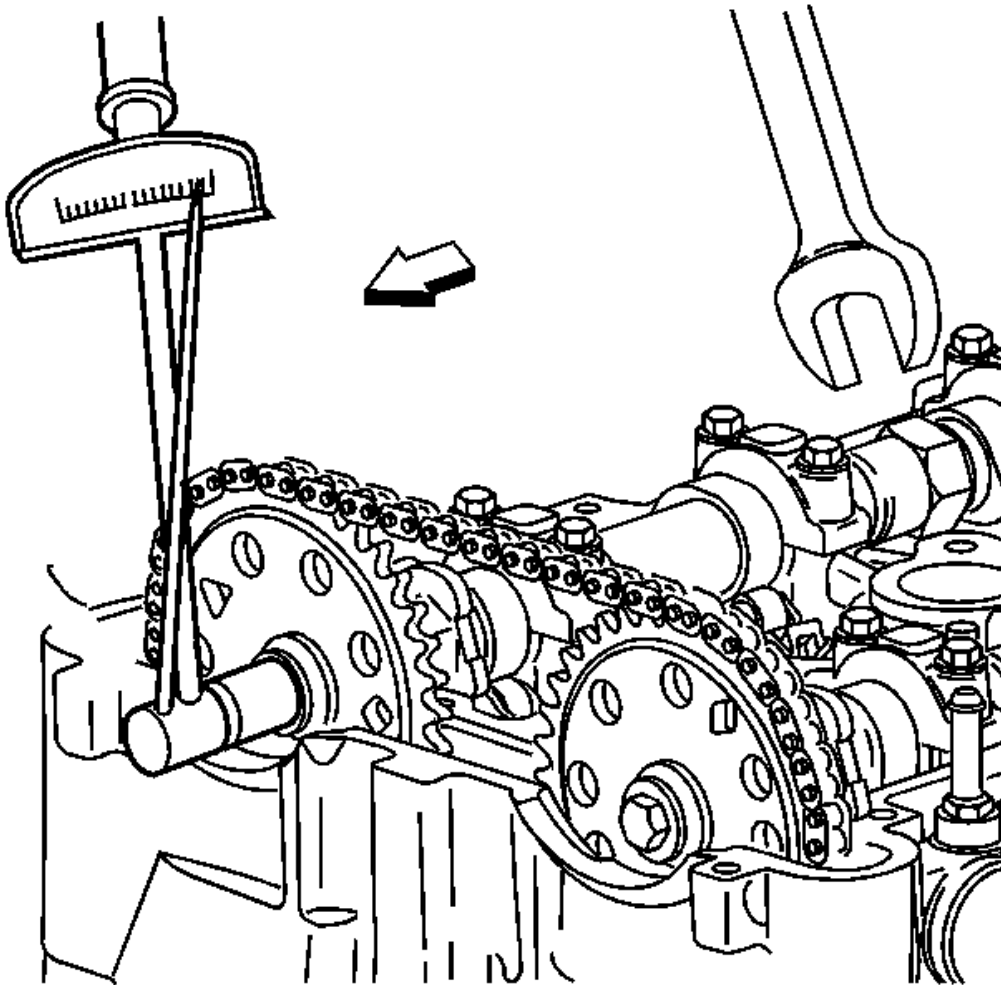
Holding Camshaft Stationary With Wrench On Hex Casting On Camshaft
